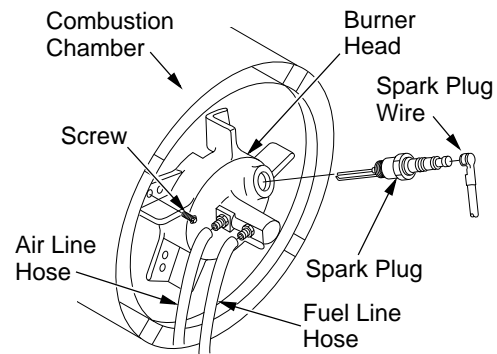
Removing Burner Head, 70/100/150,000 Btu/Hr Models
